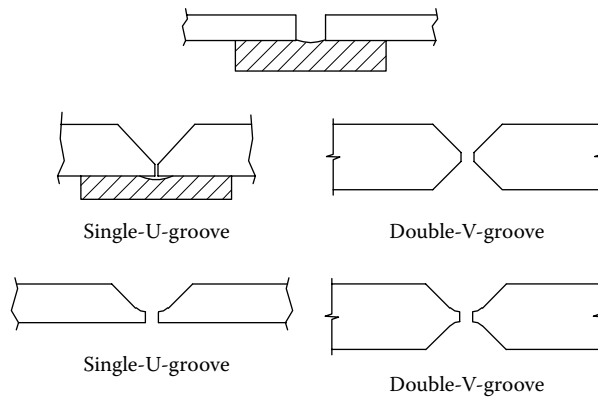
Typical joint design for welding of copper and copper alloys.
